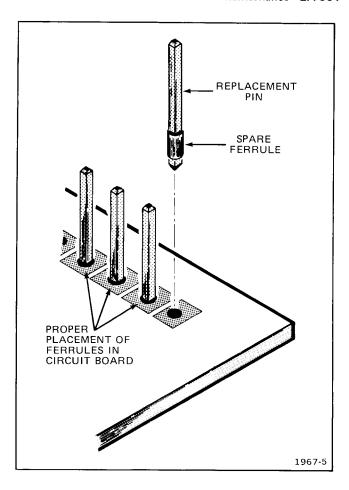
Exploded view of circuit-board pin and ferrule.
